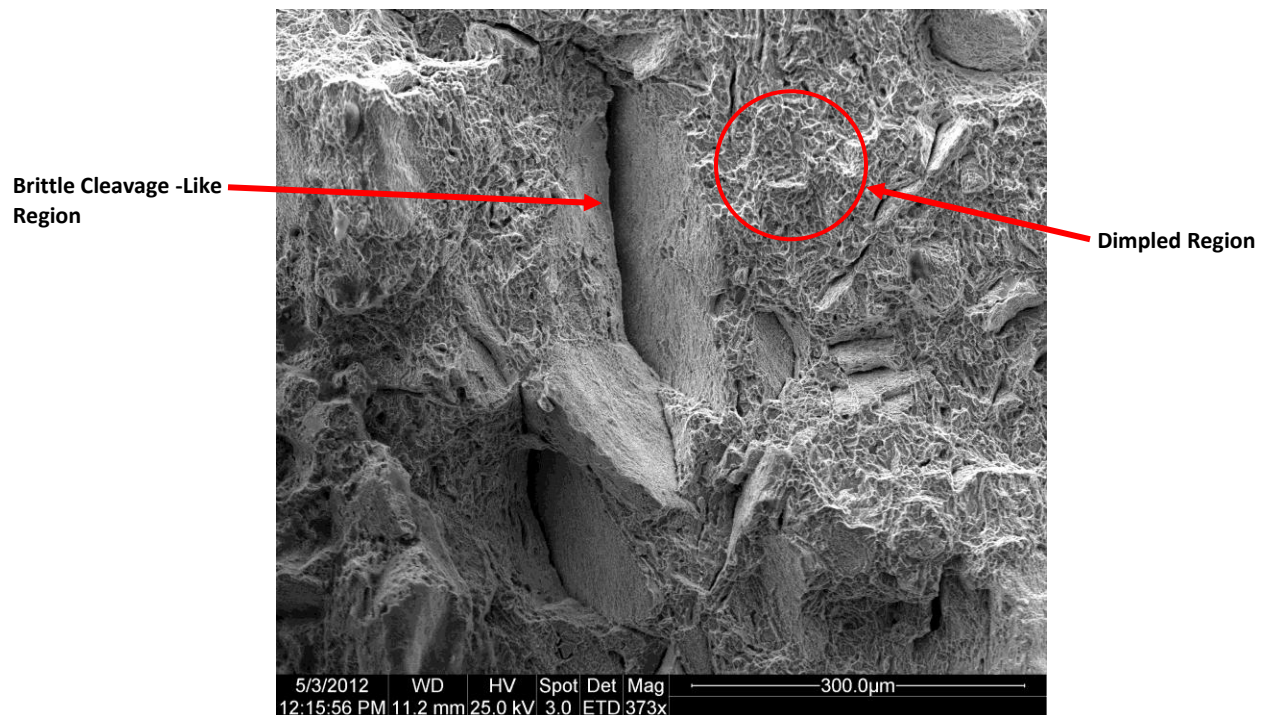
SEM fracture surface image of the low ductility specimen showing dimples as well as brittle cleavage-like regions.
